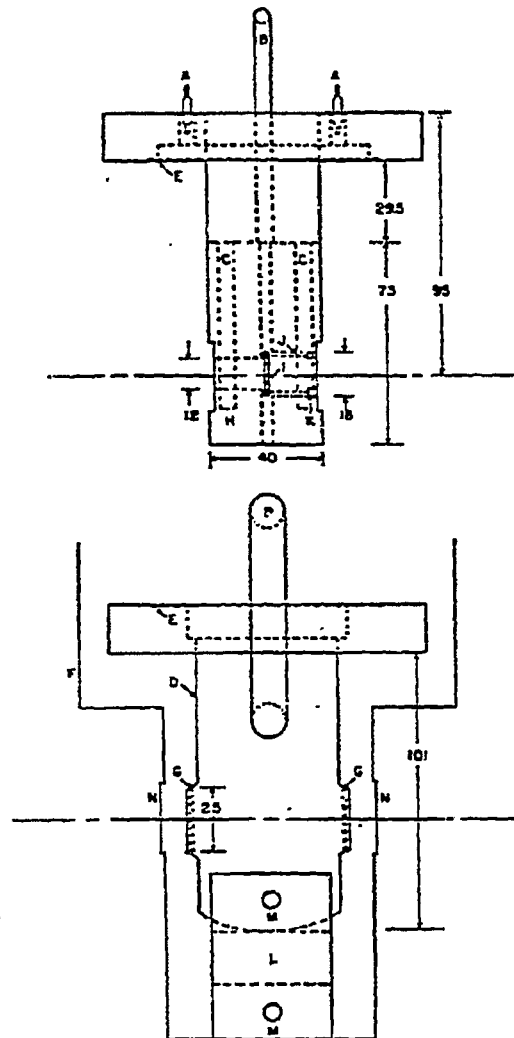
Mössbauer absorber cell with the sample holder assembly raised and thermocouples, flange bolts, and bolt holes omitted. Dimensions in mm. A—Thermocouple feedthroughs; B—gas inlet tubing; C—heater wells; D—outer shell; E—gasket for ConFlat flange; F—copper heat shield; G—Be window; H—sample holder block; I—sample; J—retaining ring; K—hollow boron nitride screw; L—cell mount; M—screws to secure cell and mount; N—Be window; P—gas outlet.
